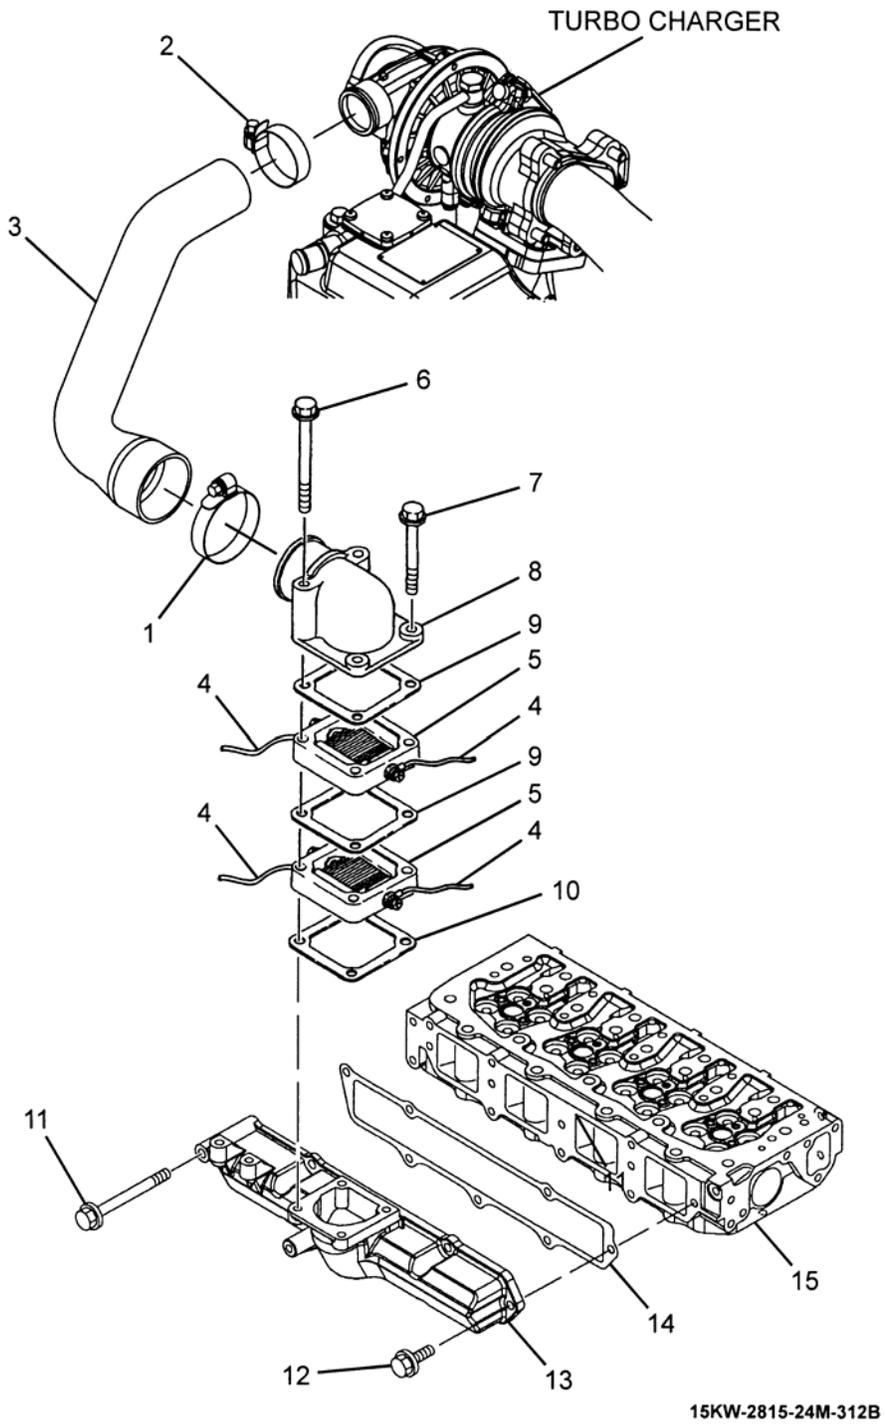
Intake Manifold, Air Inlet Hose, and Air Heaters.
